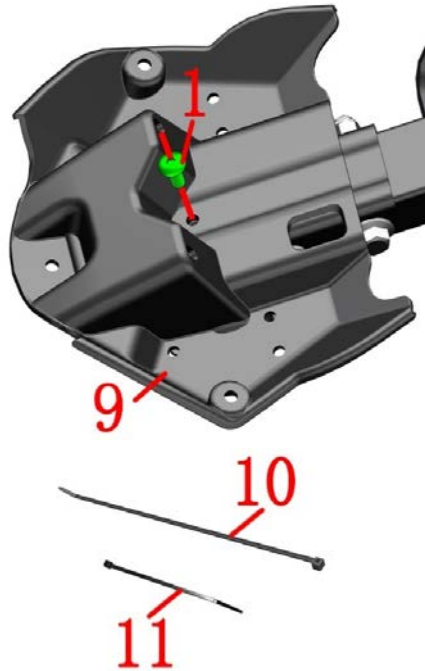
Front Fork Assembly		Headlight Assembly 1	CHK	CAUTION
